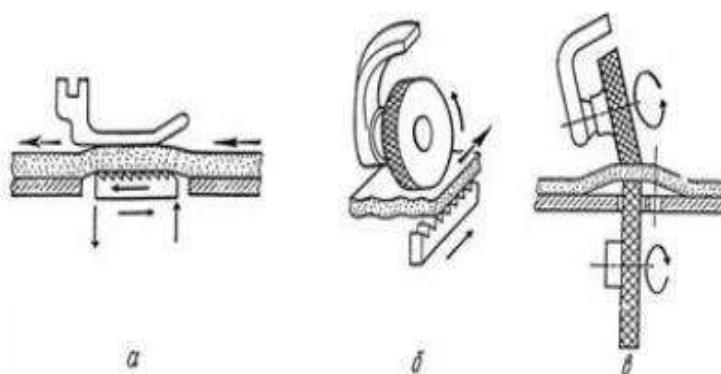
Crosslinking transport mechanisms: a - Rack and pin; b - Rack and roller; c - Roller and bottom conveyor ring
